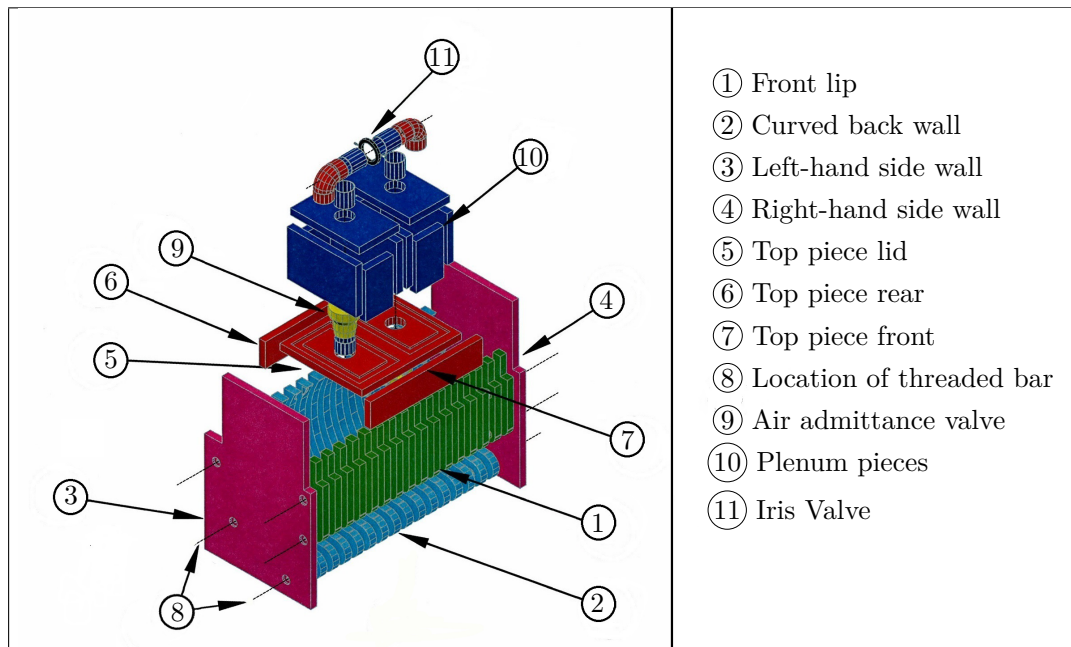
Exploded drawing of single-chamber OWC model.
